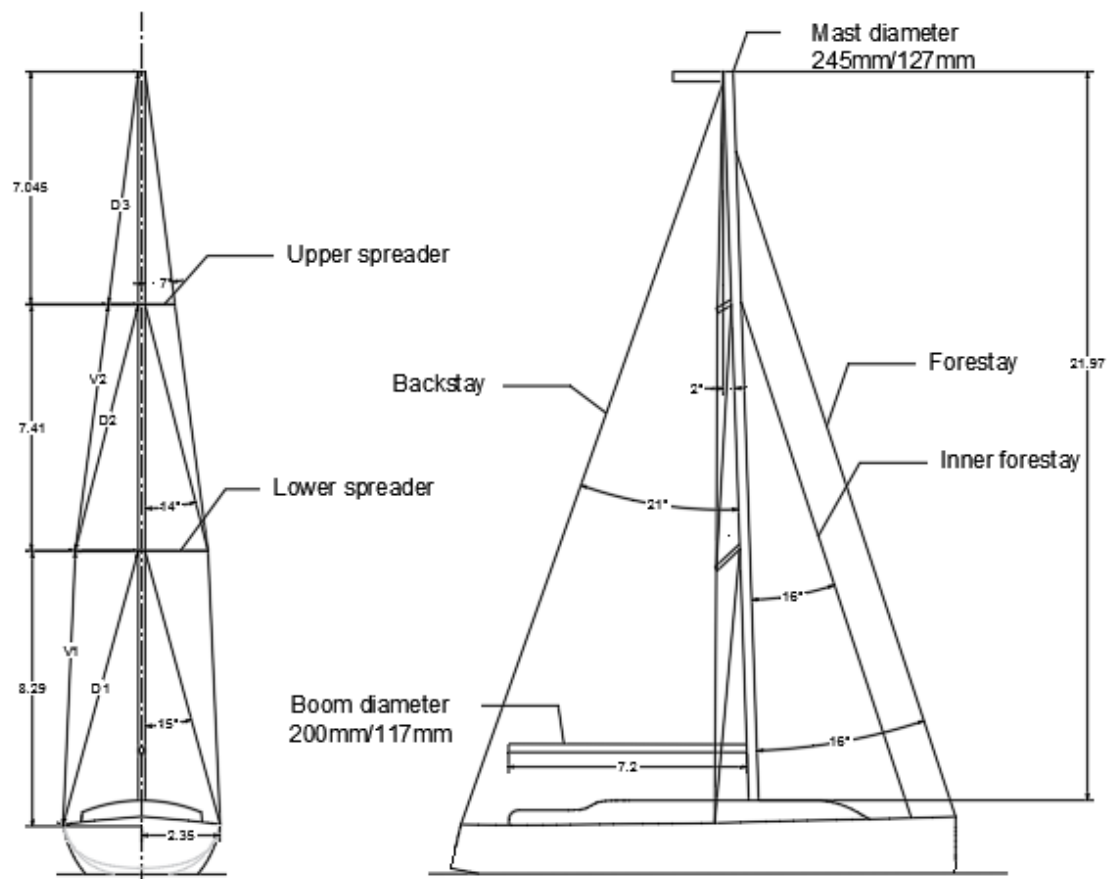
Sloop rig design and dimensions (meters). AutoCAD drawings. Own elaboration.
